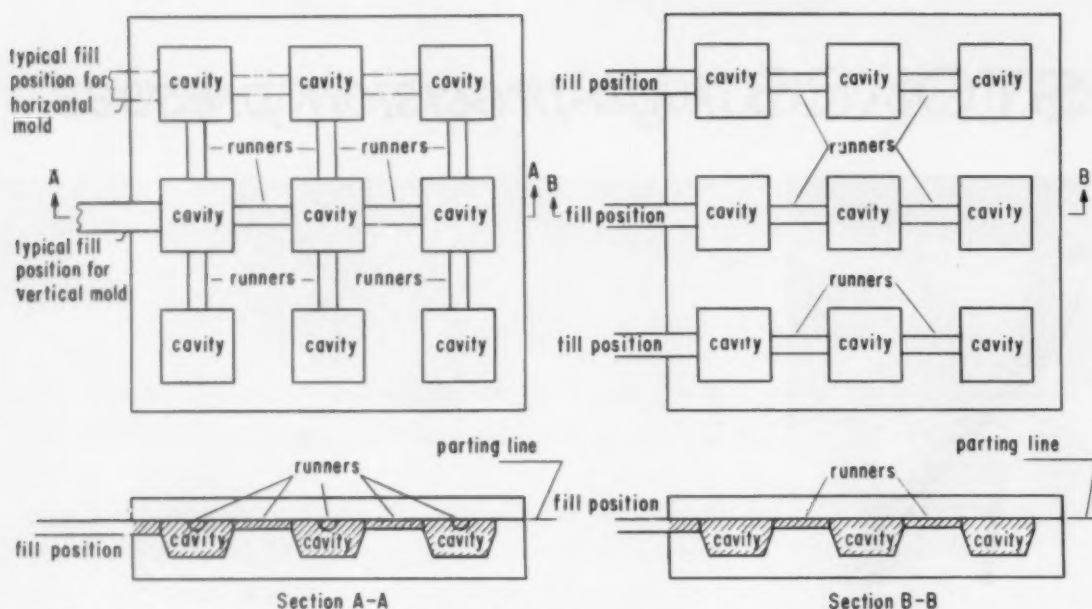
Multiple-cavity runner-type foam molds. Mold at left uses one filler tube for all nine cavities; mold at right uses one filler tube for each set of three of nine cavities. Both runner systems are prone to blockage and incomplete filling of the mold. In addition, foam scrap is difficult to re-use, resulting in increased material cost.
